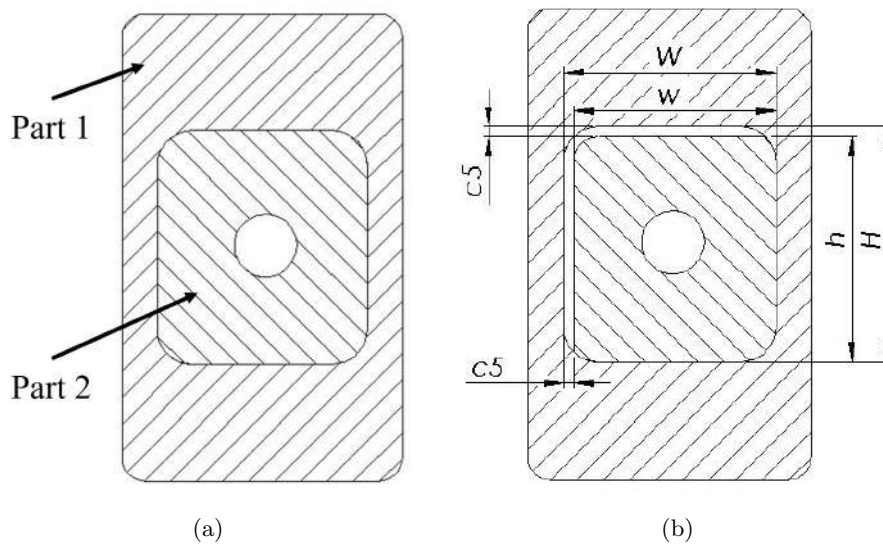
Section view of the assembly of part 2 on part 1. (a)
